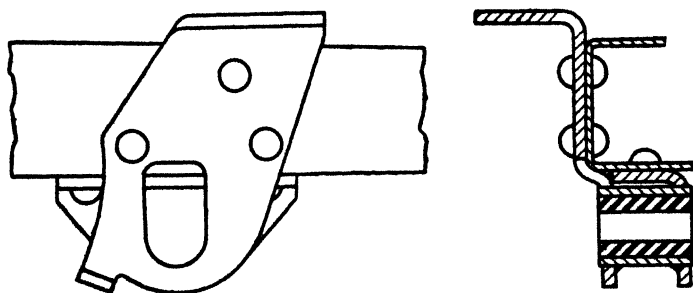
WELDED-STEEL, RUBBER-BUSHED SPRING BRACKET.
